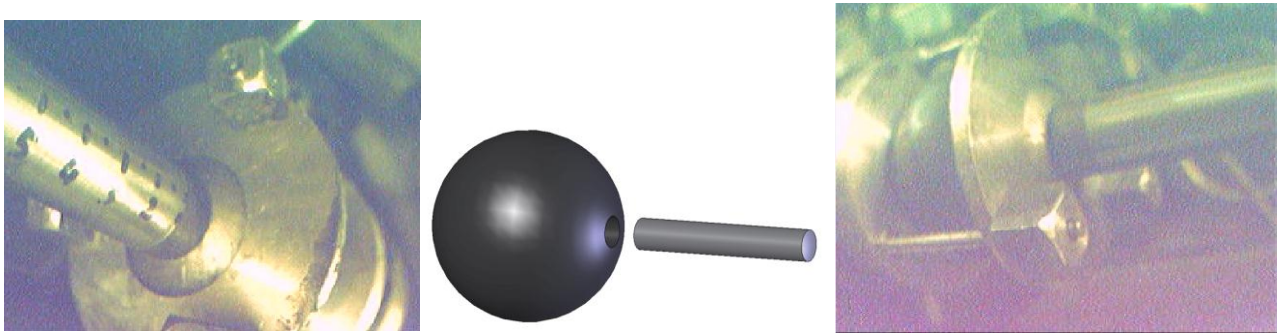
Sketch of drilled fuel element with extracted carrot and pictures of the drilling process
